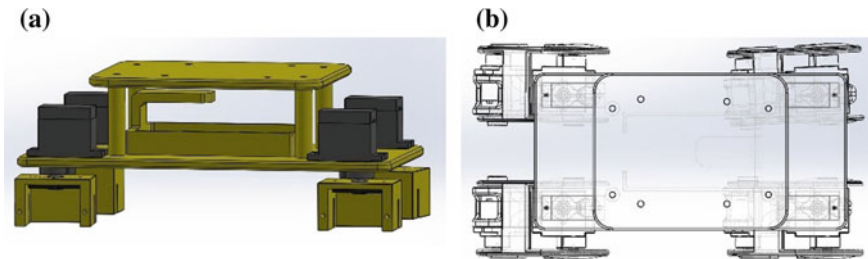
Mechanical model of the body frame a side view b top view
